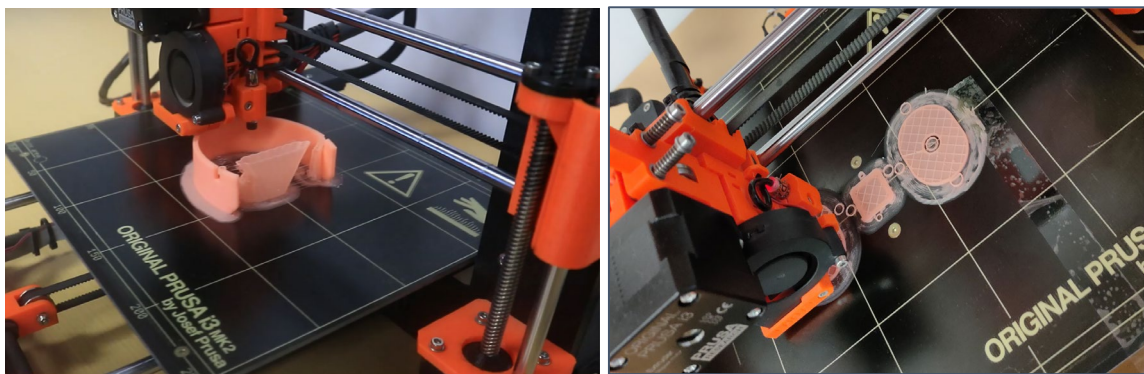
3D Printing of prosthesis parts using Prusa FDM machine
